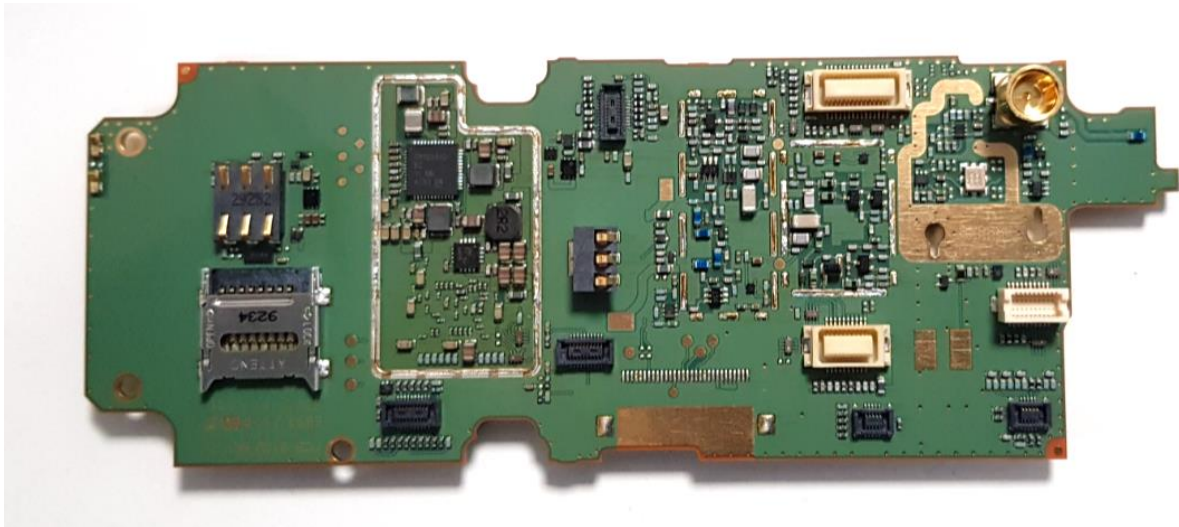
SC2028 Main PCB Bottom View With Cans Removed
